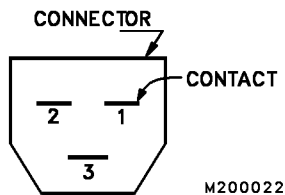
SENSOR SIDE CONNECTOR VIEW
